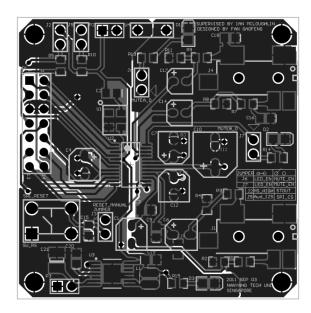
Layout [Test Picture for lof display test purpose only.]
